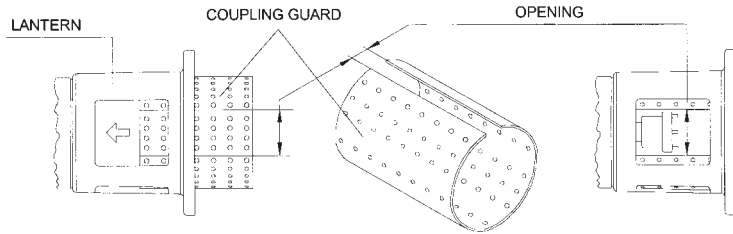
PREPARING TO ASSEMBLE THE MONOBLOCK DESIGN
